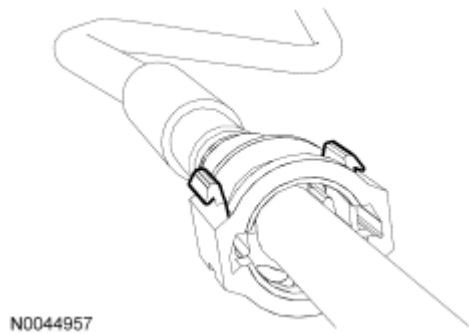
Identifying Locking Mechanism And Quick Connect Coupling Housing
